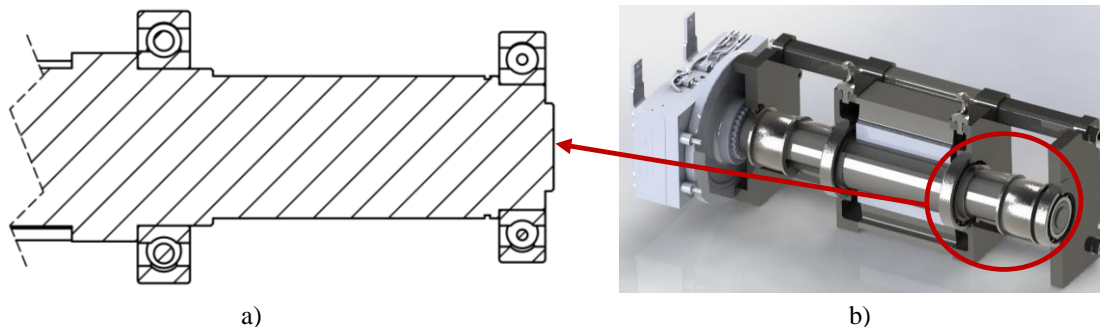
a) Shaft cross section between bearings, b) Section view of designed motor
